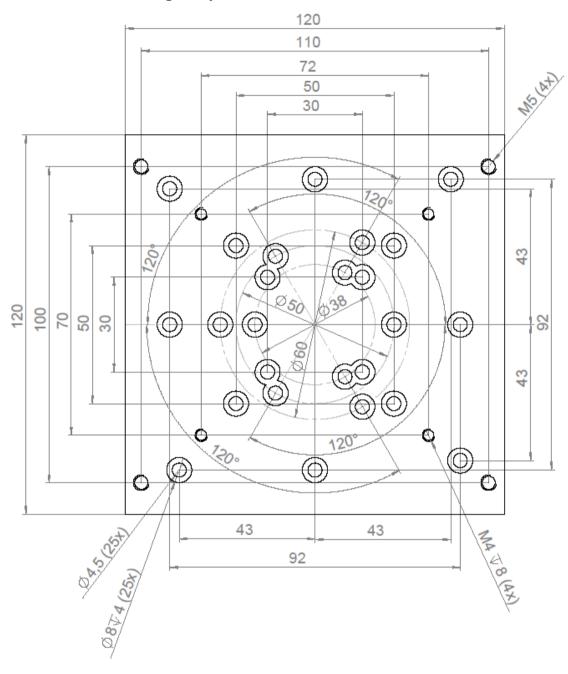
Dimensions of the M-403.AP3 mounting adapter
